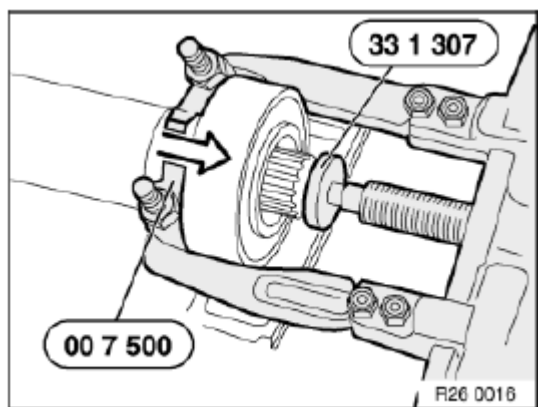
Identifying Special Tool (00 7 500, 33 1 307) On Center Bearing
